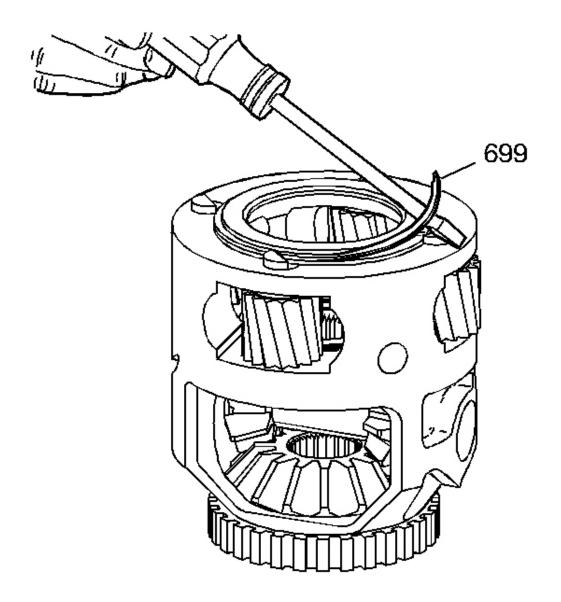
Using Screwdriver To Remove Front Differential Carrier Snap Ring Courtesy of GENERAL MOTORS CORP.
